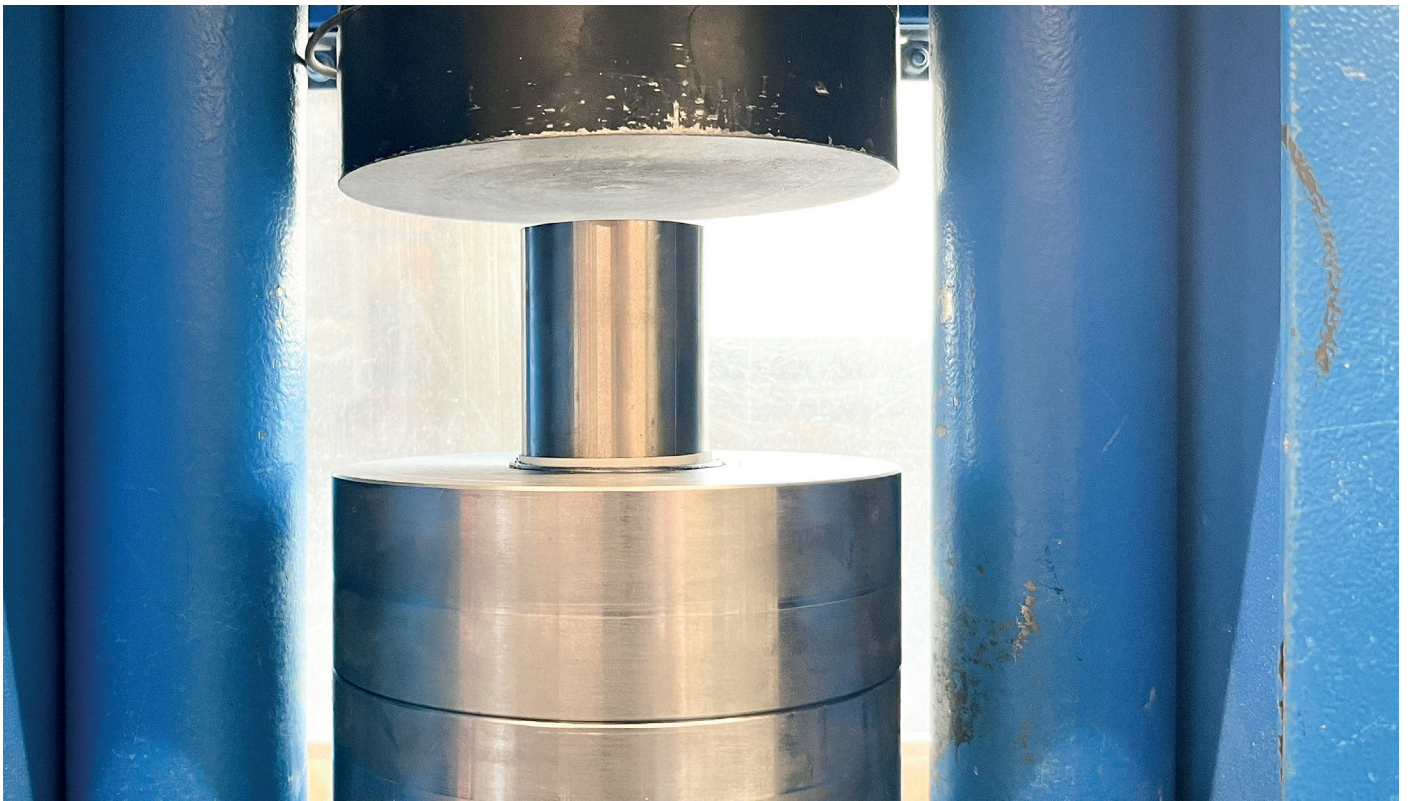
Pressing setup with the closed mould and plunger during compaction.
